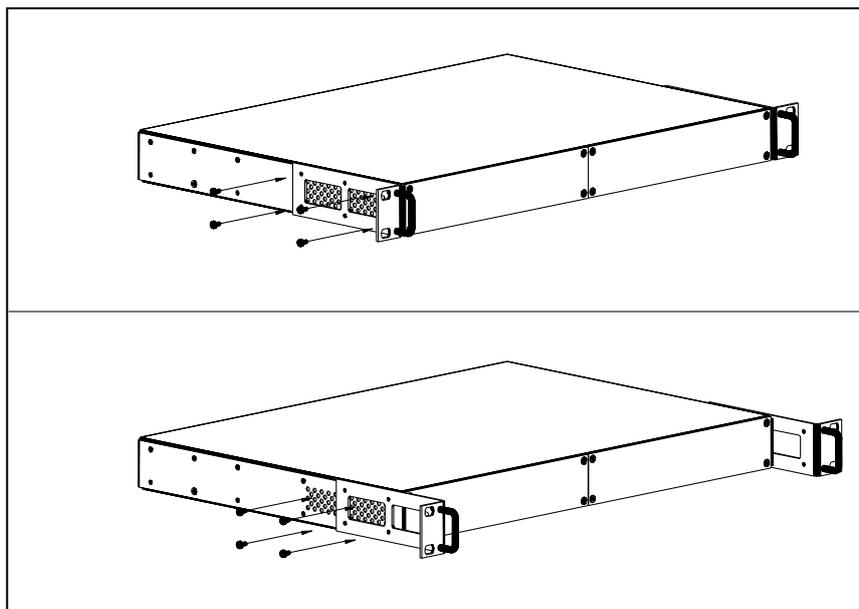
ProDAQ 5720 Front Rack-mount Options
